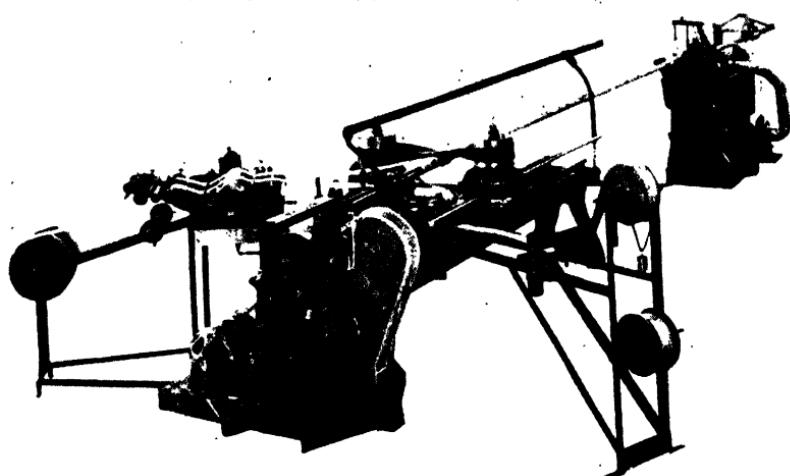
Spiral paper-tube machine with full automatic feed. (*Courtesy of the M. D. Knowlton Company.*)
